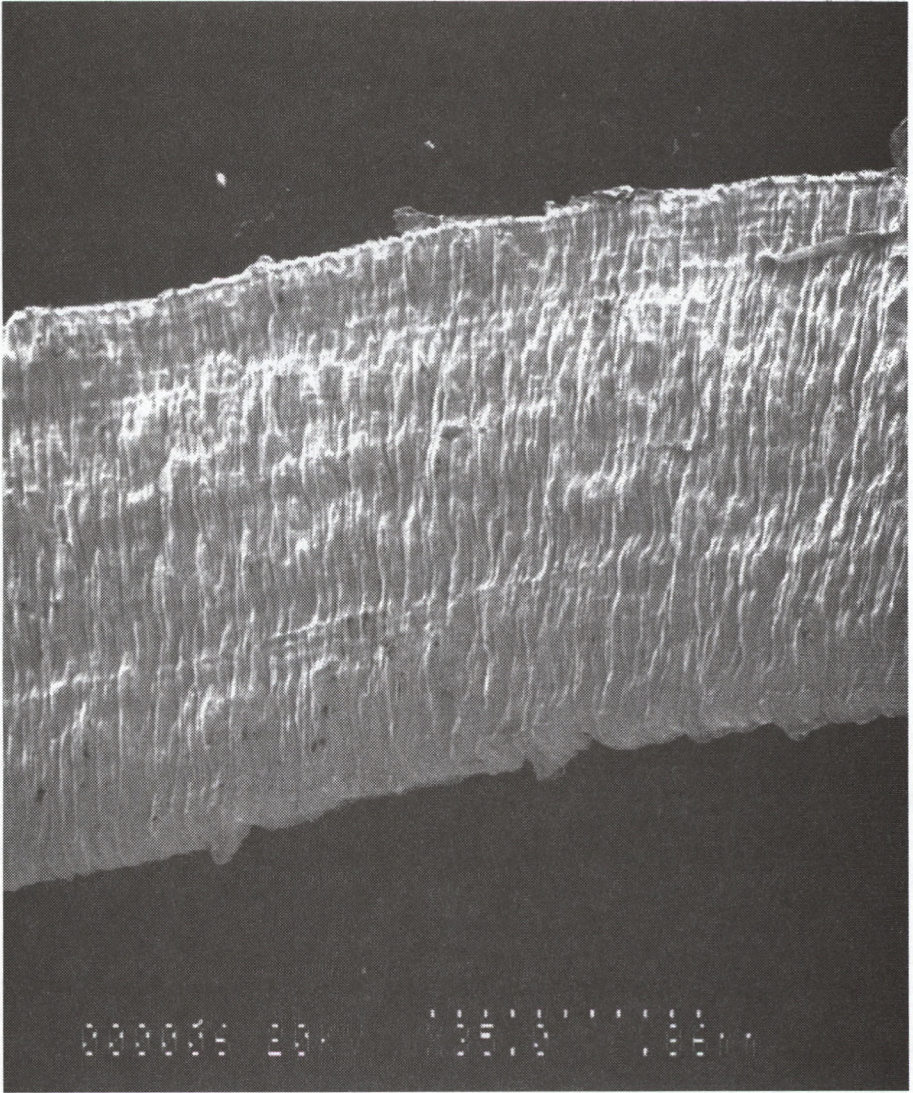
Lathe Swarf surface of machined 95%Pt-5%HTA
